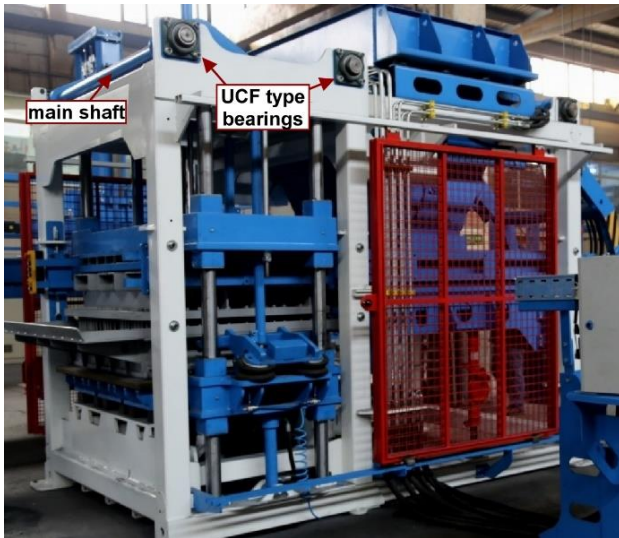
Main shaft and UCF type bearings on a fully automatic CBBM
